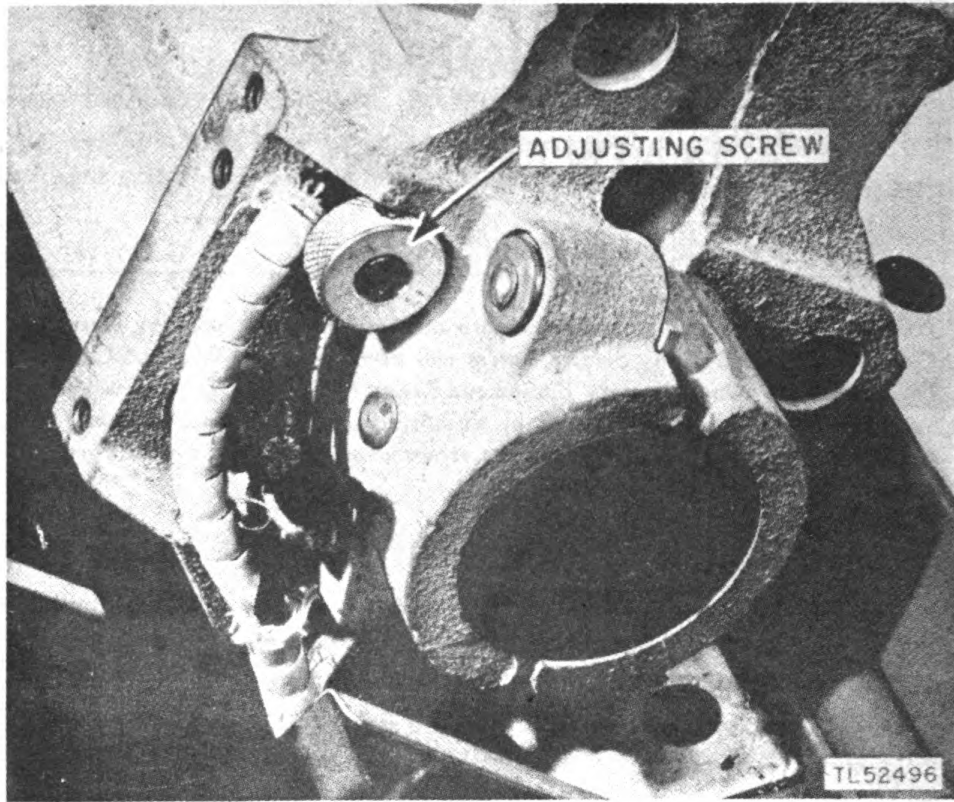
Thermoswitch adjustment on Vulcanizing Equipments TE-54-A and TE-55-A.
